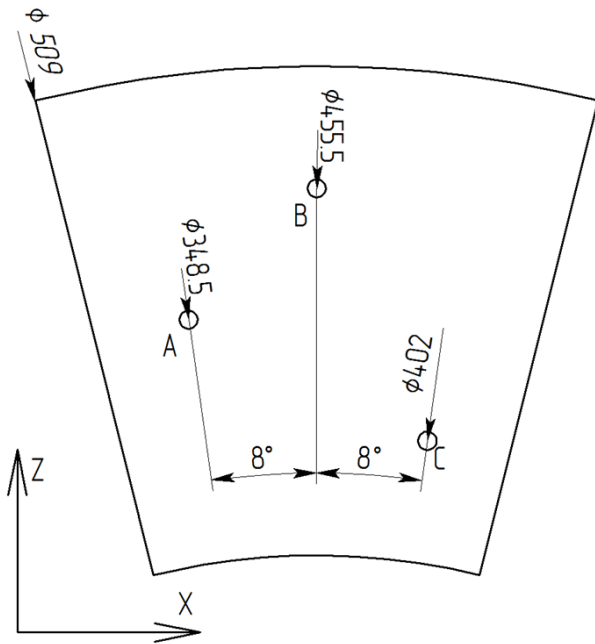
The dimensions of the cylindrical testing object with the flaws location.
